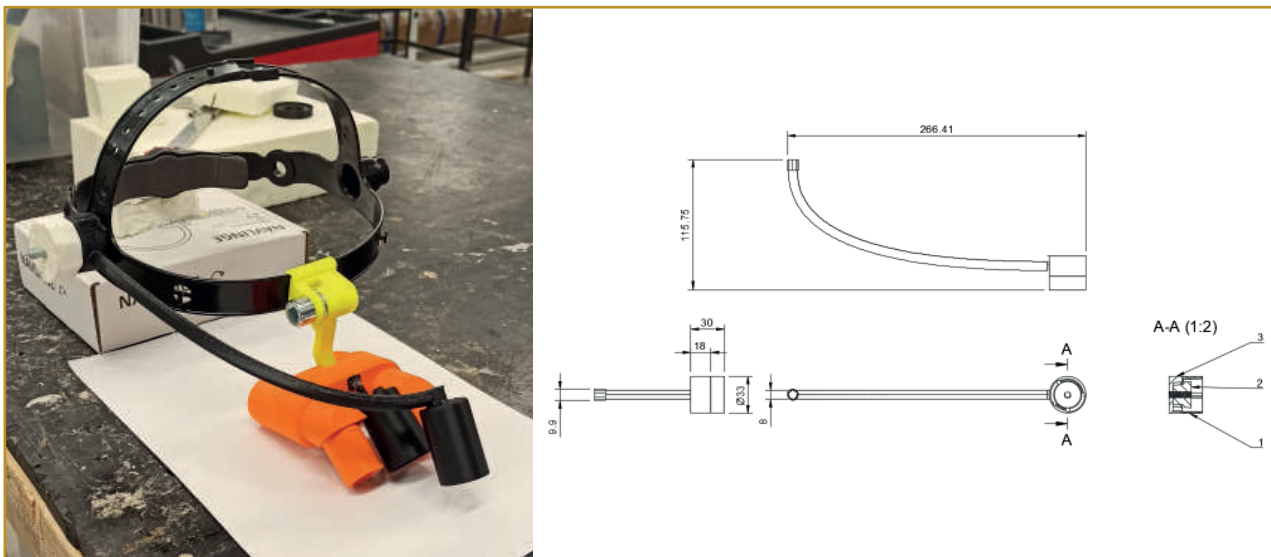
Separate adjustable arc light that mounts onto the headband instead of the headset
